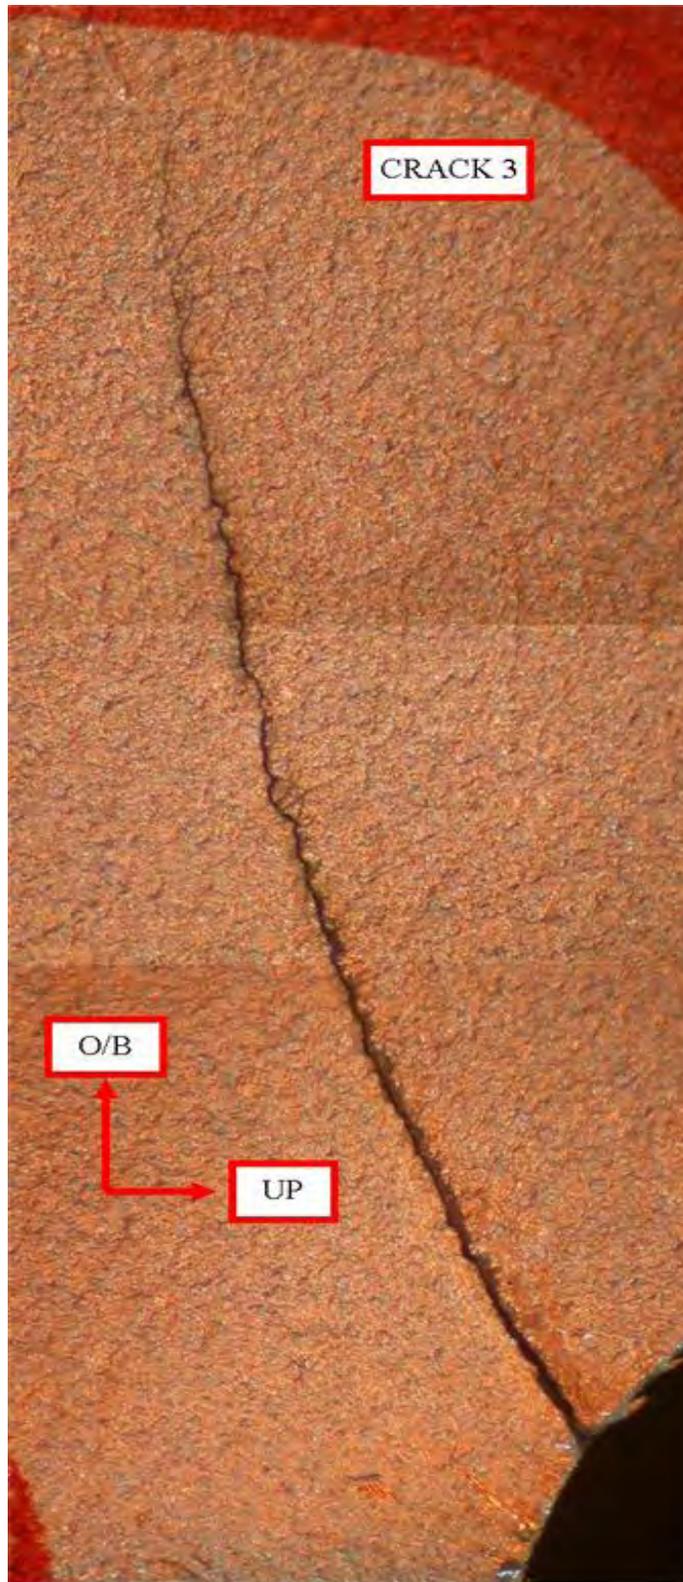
Macroscopic View of Crack 3 on the Right Wing Bulkhead Wing Fillet WS 30 FS 191.7
